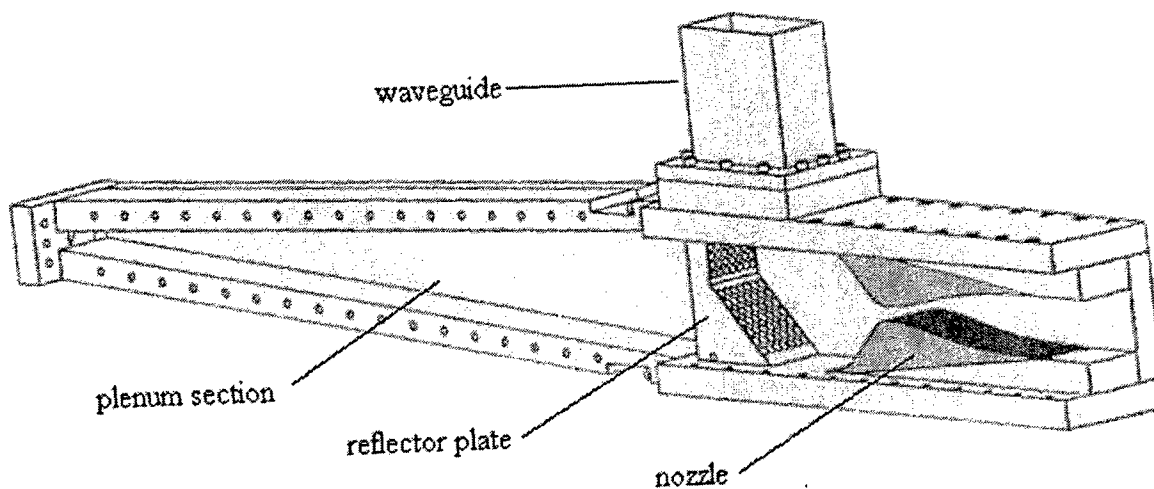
PLENUM AND NOZZLE CUTAWAY DRAWING
